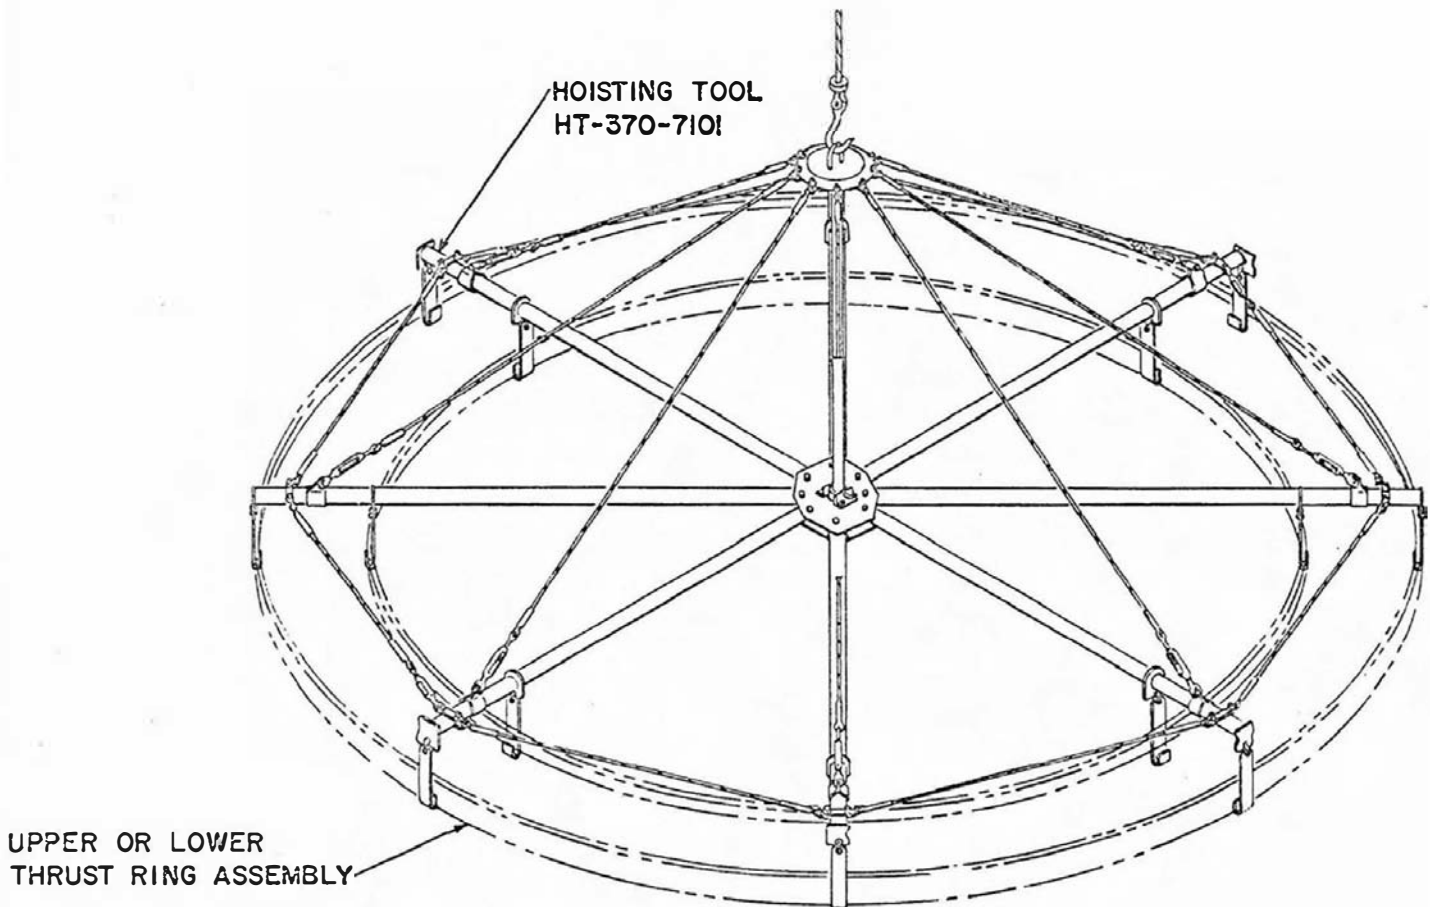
Upper and Lower Thrust Ring Assembly Hoisting Tool
